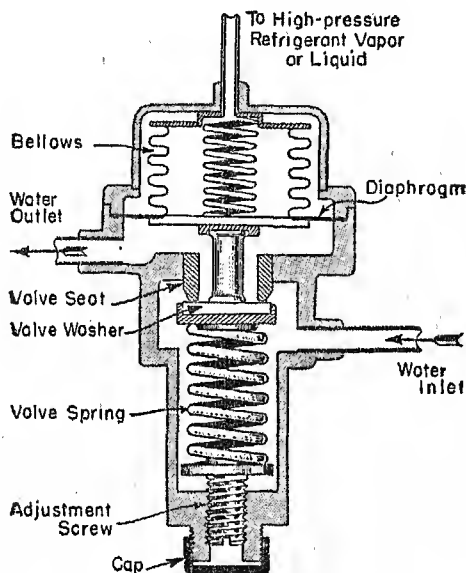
The Principal Parts of a Water Regulating Valve.
